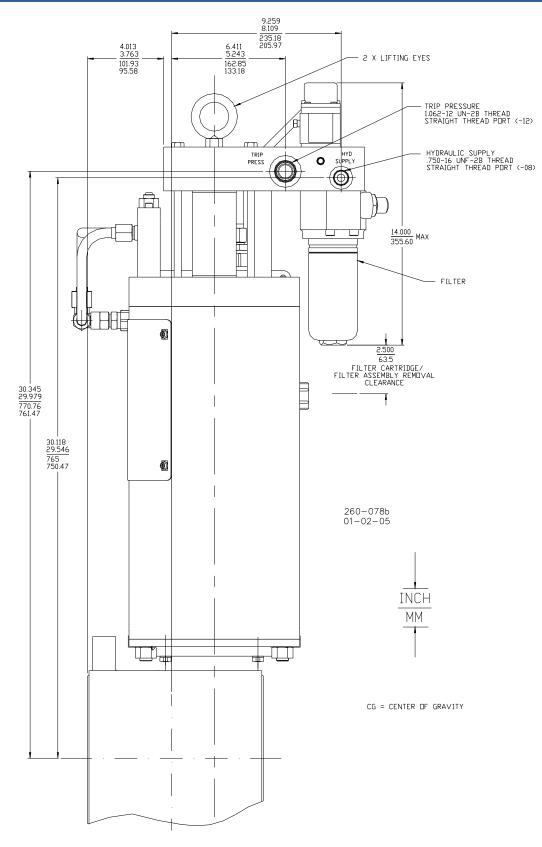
Gas Stop/Ratio Valve Outline Drawing (6-inch, except SS-260)
